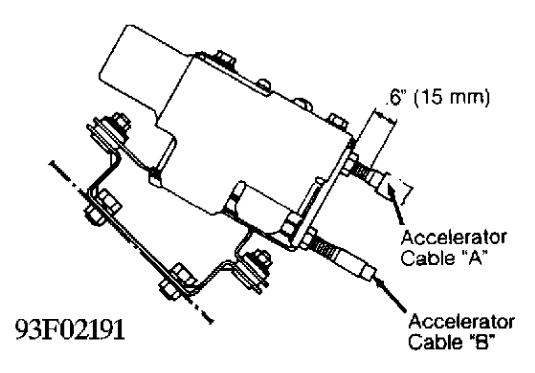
Adjusting Cruise Control & Accelerator Cables (1991 - 1 Of 4) Courtesy of Mitsubishi Motor Co.
